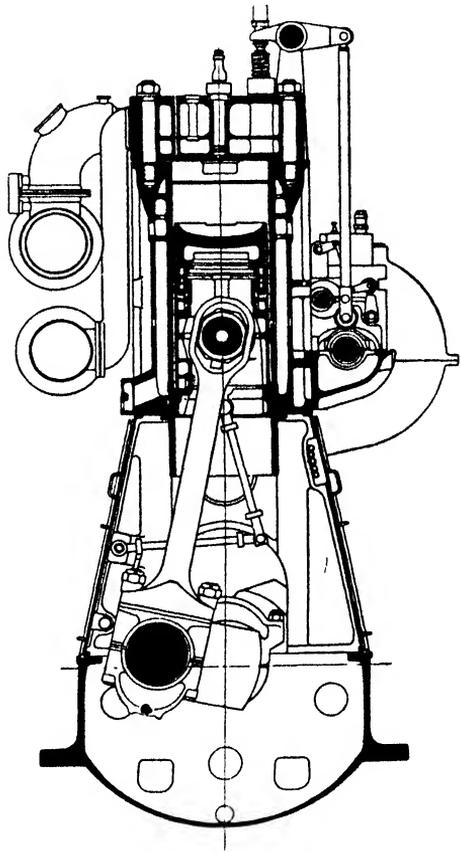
Section through Cylinder of 700-b.h.p. M.A.N. Trunk Piston Airless-injection Engine
